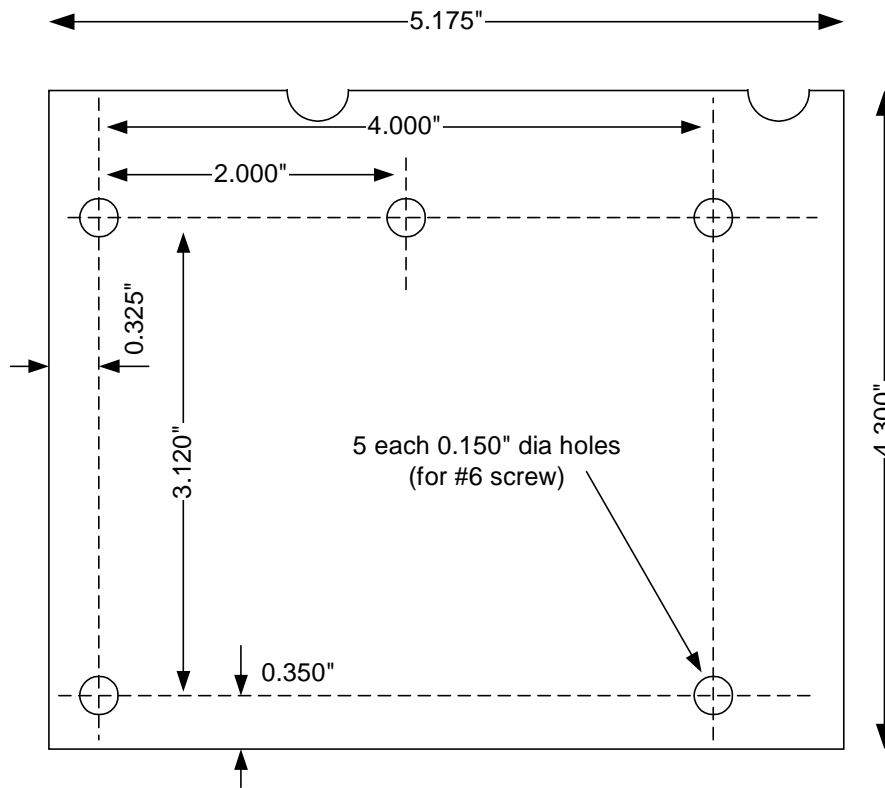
PMDX-130 Dimensions and Mounting Holes
